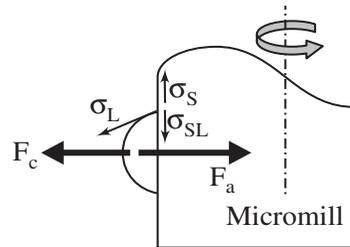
Force balancing of a microdroplet on the rotating tool.
